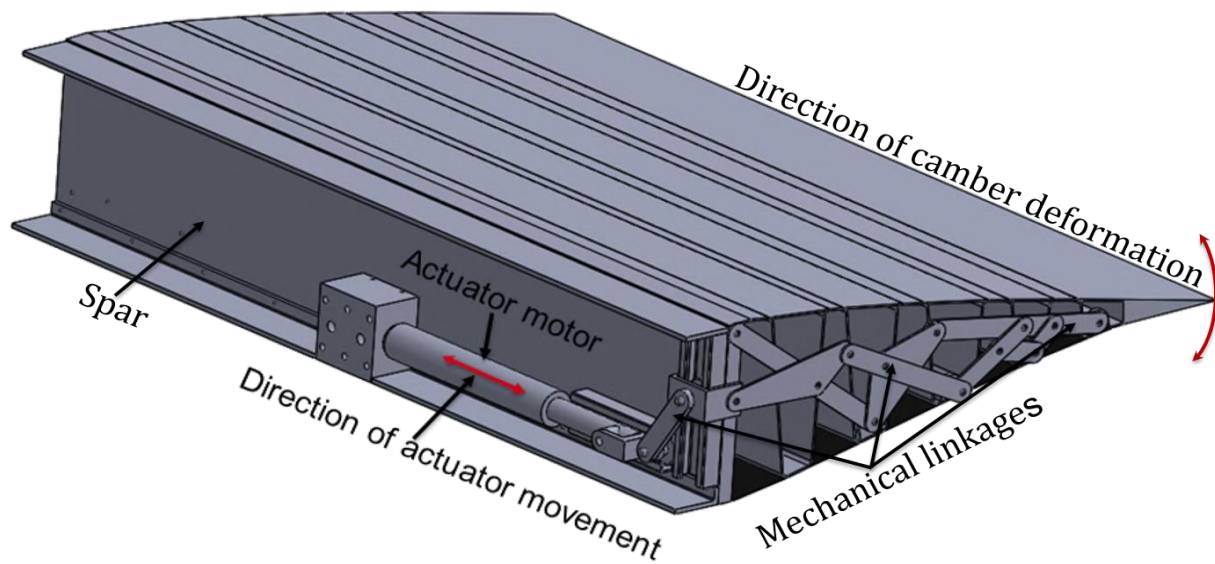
CAD model of the morphing blade section with actuation mechanism.
